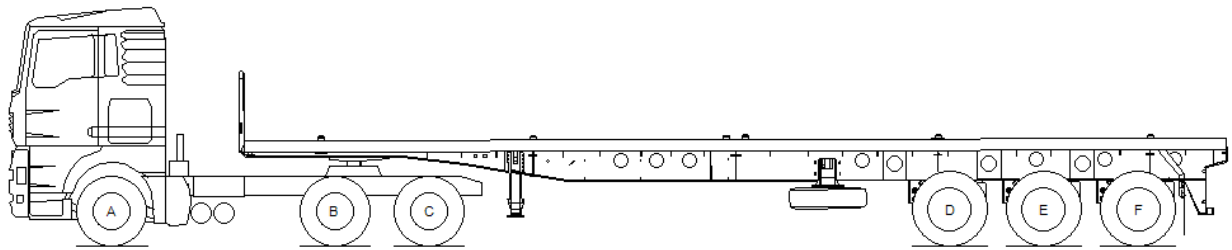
2-dimensional side view of the skeletal semi-trailer
